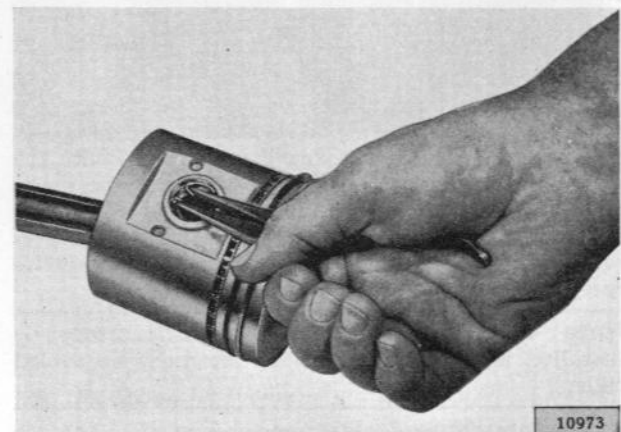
REMOVING PISTON PIN RETAINING RINGS
